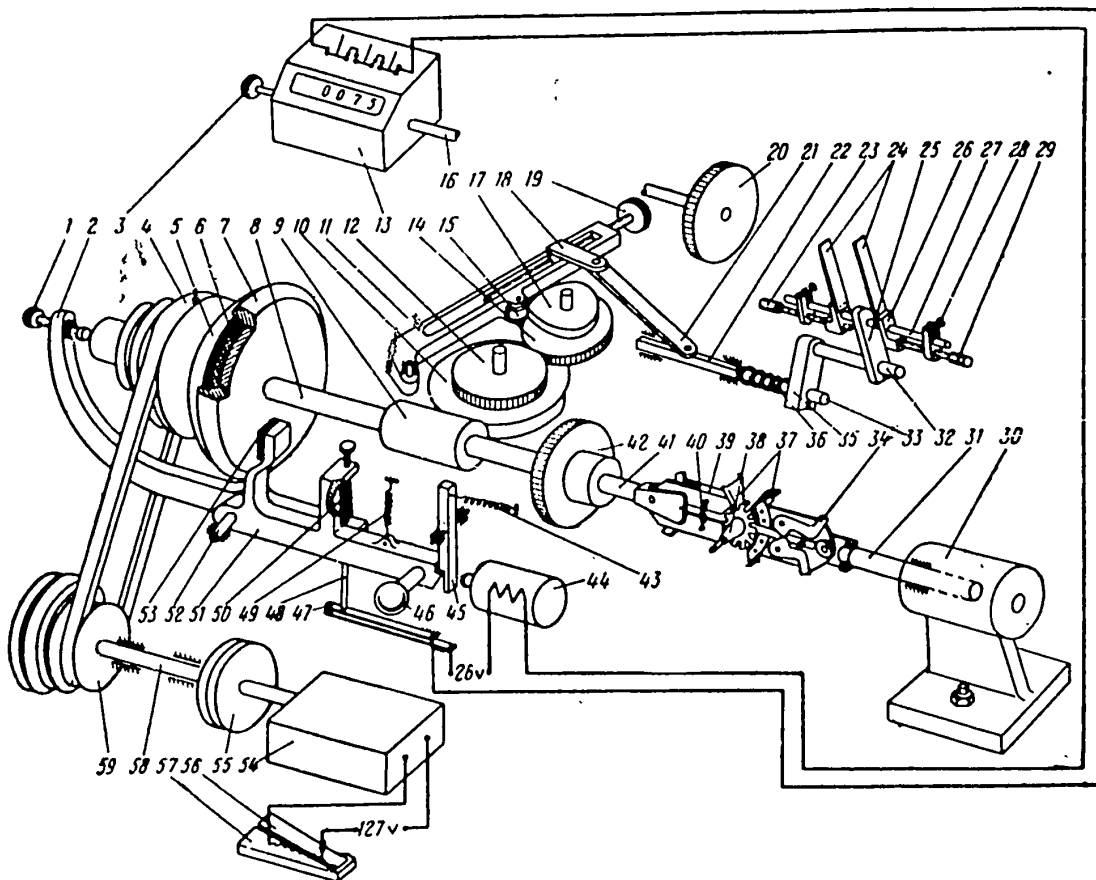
Electric-Kinematic Arrangement of the Machine.
